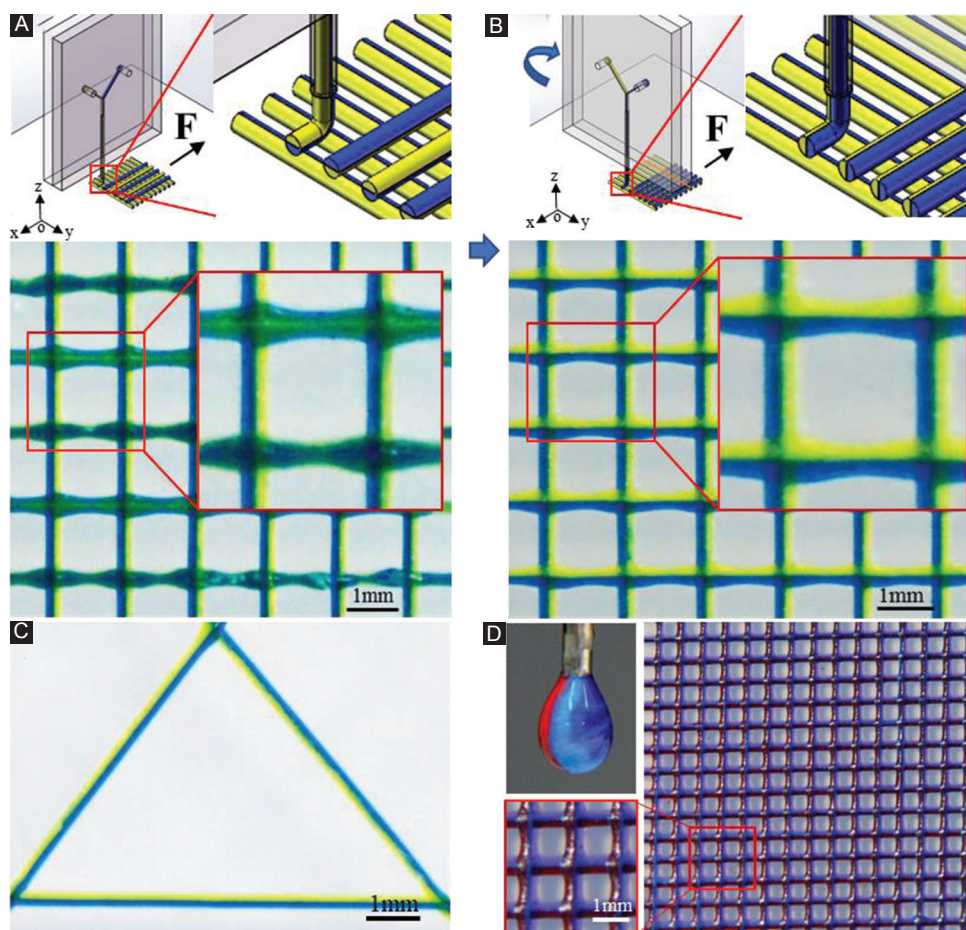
Printing of multicomponent grid structure using rotating microfluidic printhead. (A) Schematic and photograph illustrating printed grid structure without the rotating printhead. (B) Schematic and photograph illustrating printed grid structure with the rotating printhead. (C) Printed triangular pattern with the rotating printhead. (D) Grid structure consists of heterogeneous filaments (red, blue, and purple).
